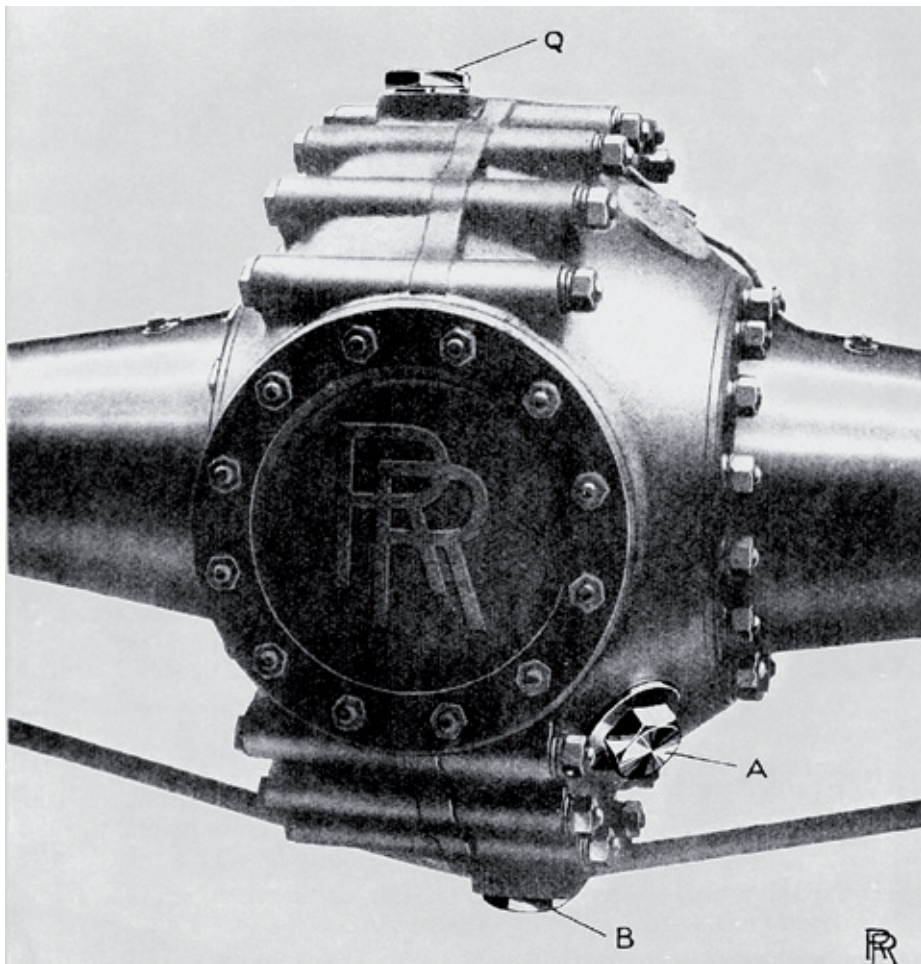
OIL PLUGS IN REAR AXLE CASING.
